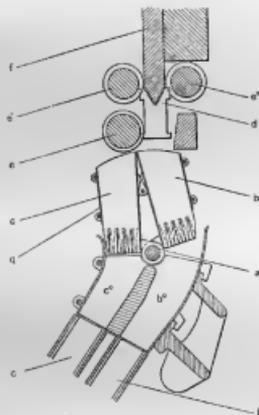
Stringertype: gear for distributing matrices to magazines. Cross-section.
